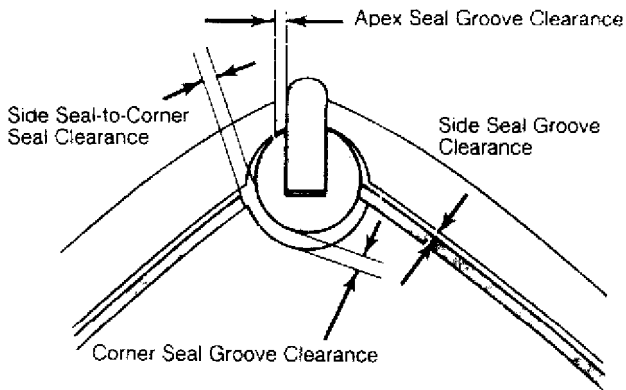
Measuring Apex, Side & Corner Seal Clearance
